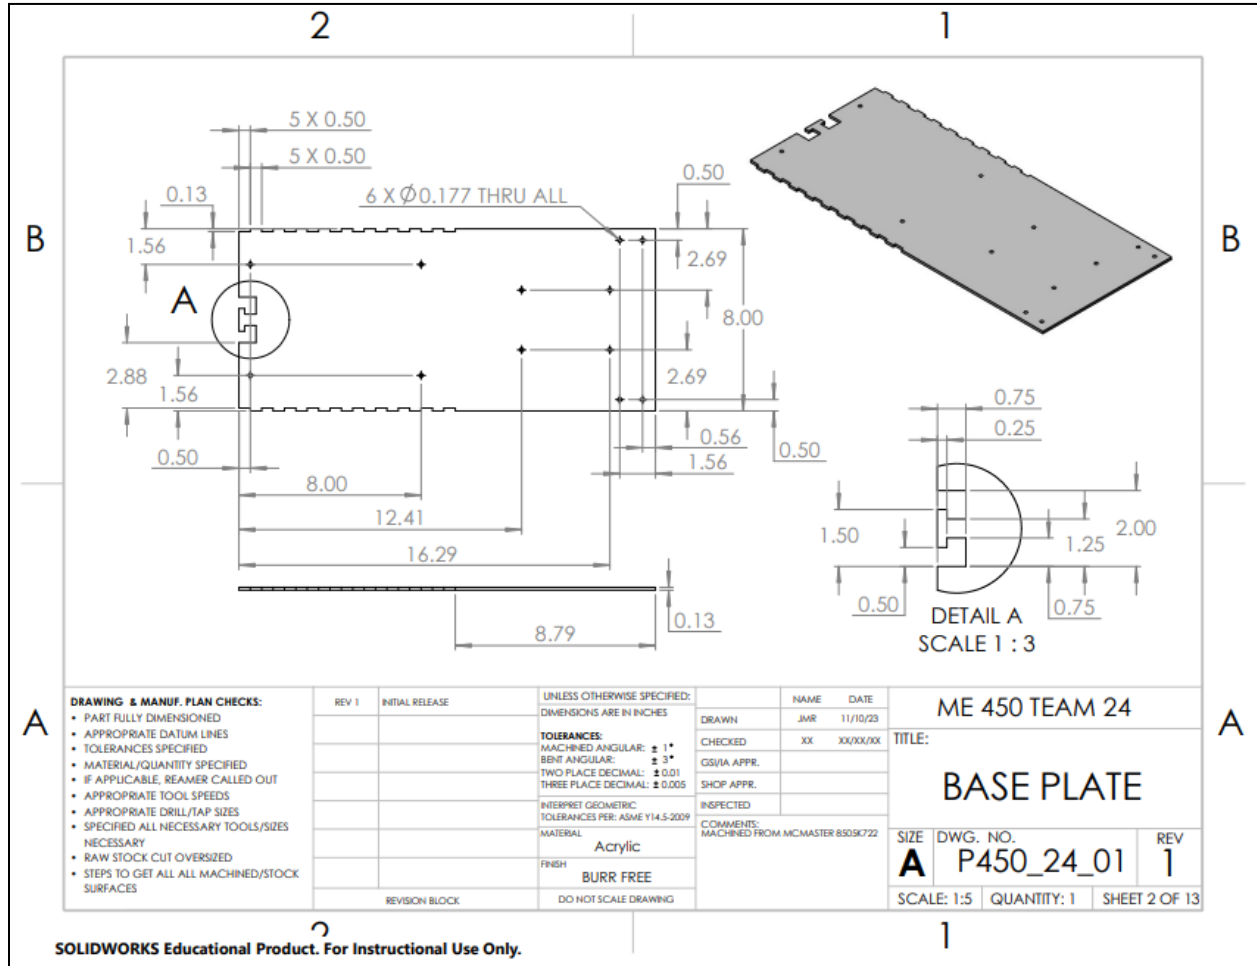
Manufacturing drawing for the base plate component of the beta design.
